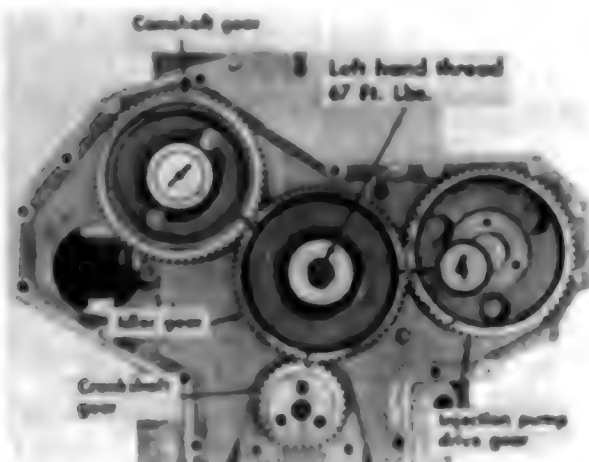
Gear train and timing marks. Use timing dot next to number 4 on injection pump drive gear on D239, D246 and D268 engines.
